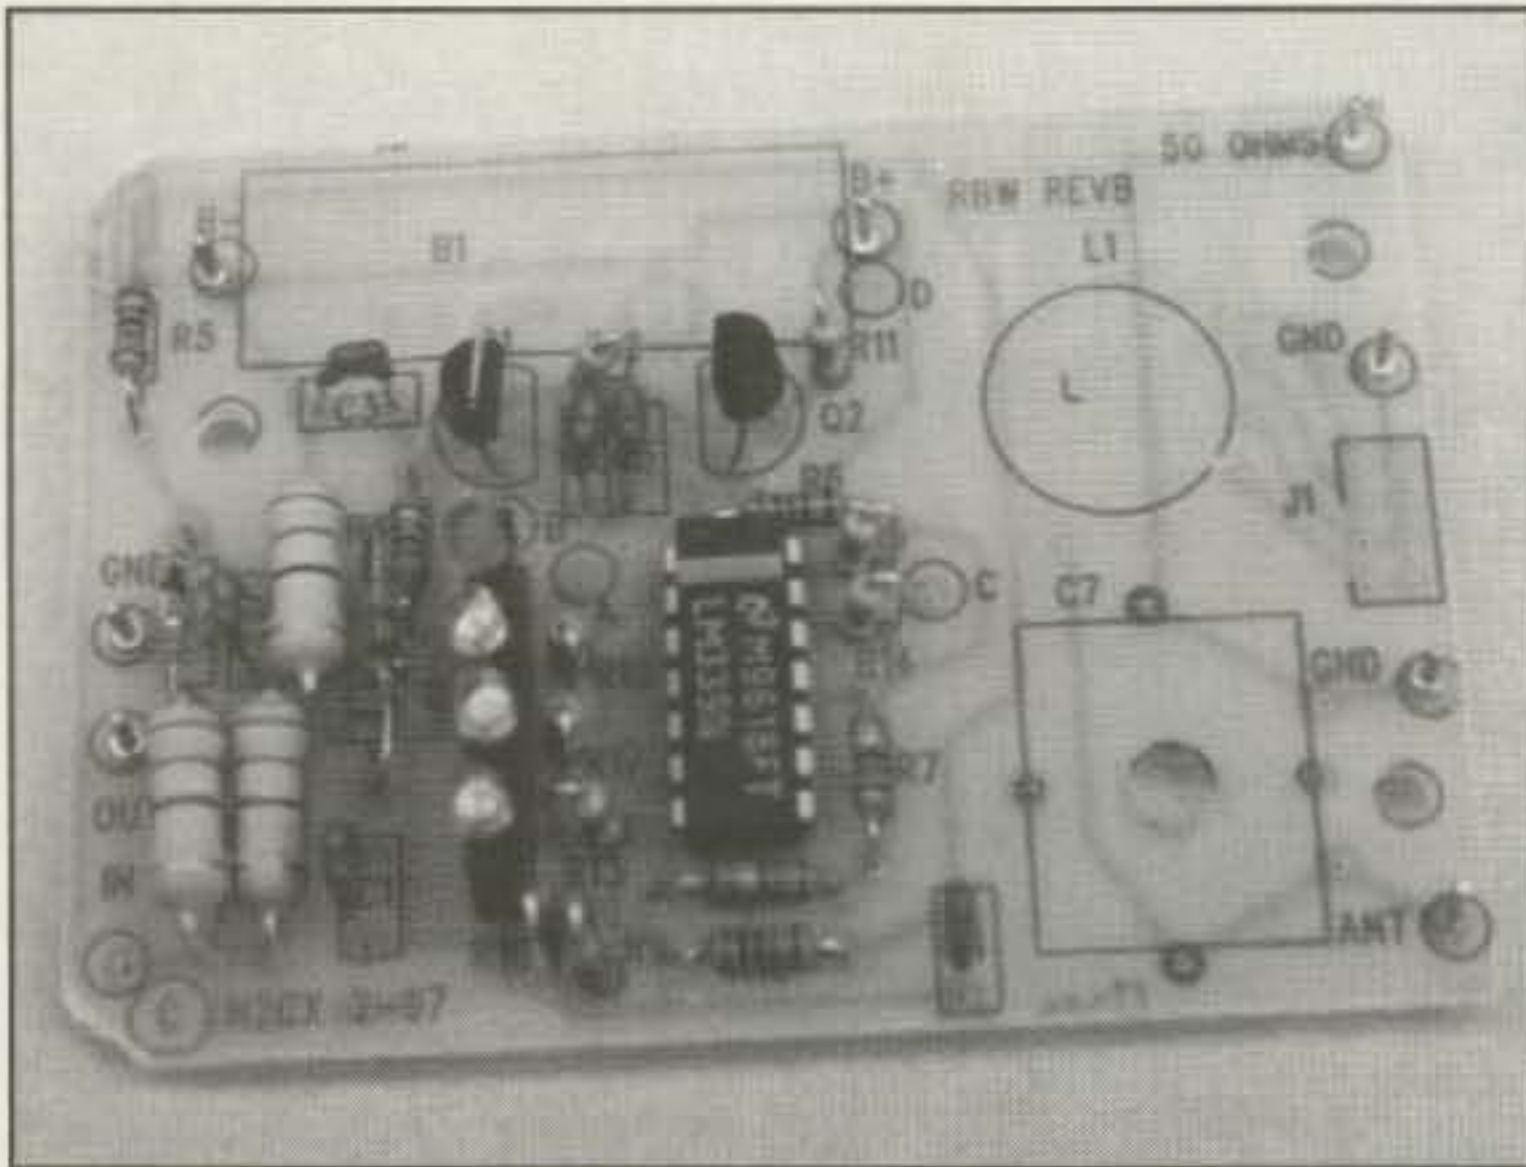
I almost forgot to shoot this midway-through-construction photo. A couple more components complete the SWR section. Then the coil is wound and mounted along with the trimmer, and checkout begins. Assembly is easy enough that anyone can do it!
